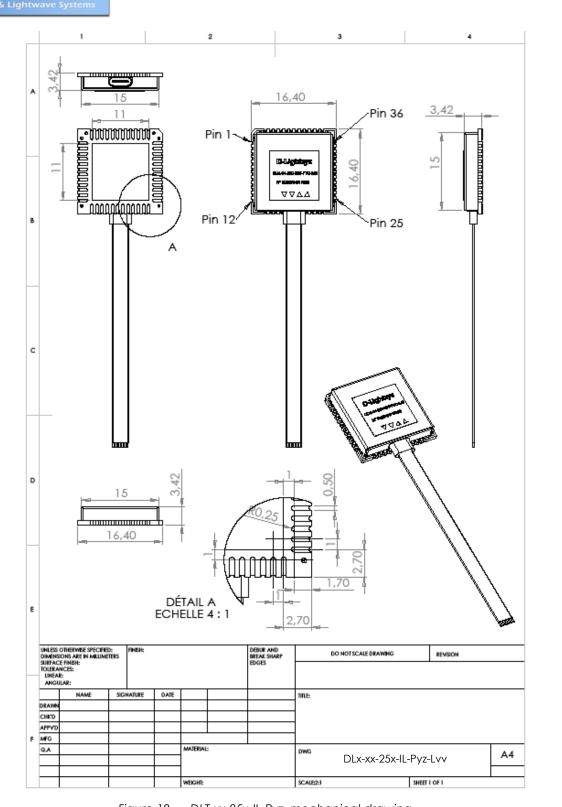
DLT-xx-25x-IL-Pyz mechanical drawing
